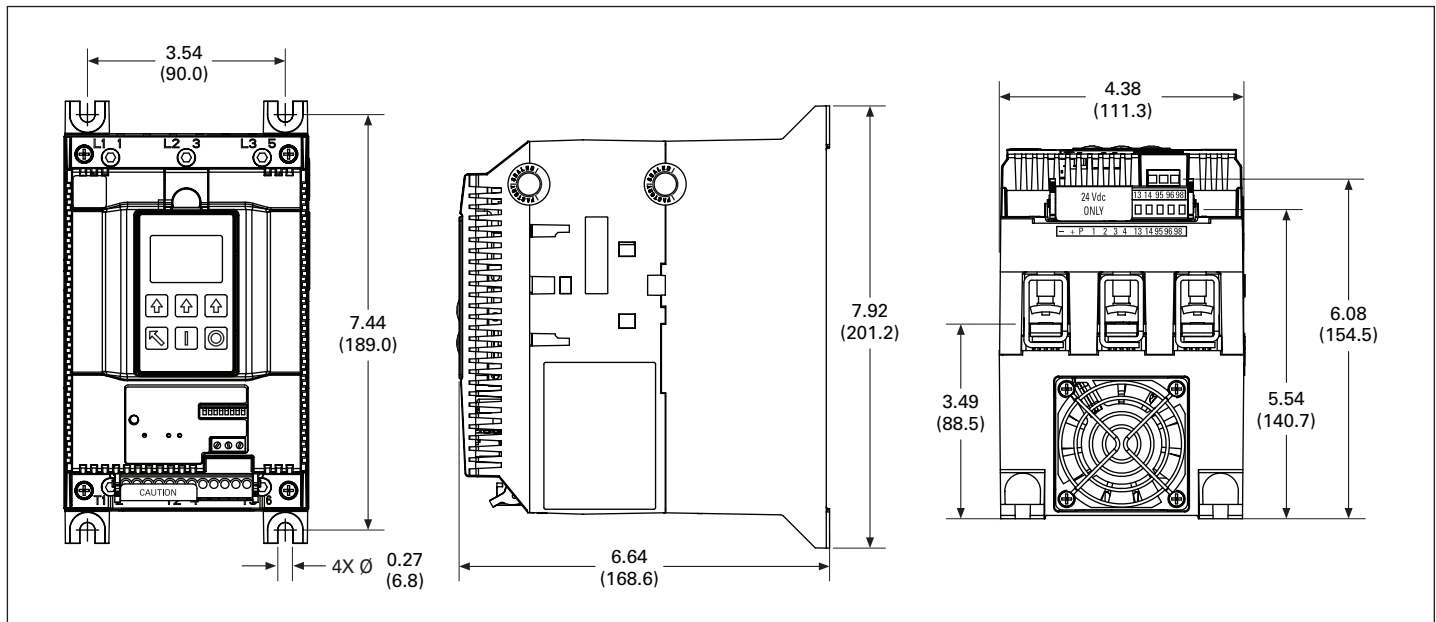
R-Frame (110 mm) S811+ Approximate Dimensions in Inches (mm)
